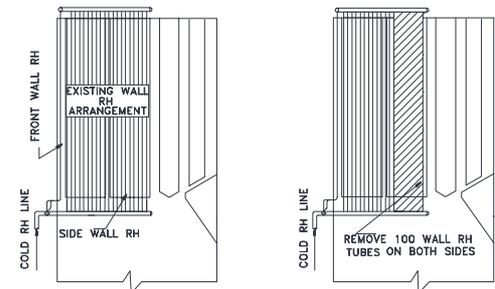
PROPOSED WALL RH SURFACE REMOVAL – TYPICAL
